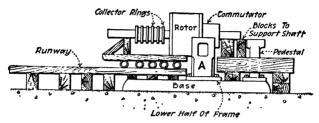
Showing the third step of a method of rolling a rotor into position in the bearings. The shaft is resting on the blocks which are placed between the frame and the pedestal.
